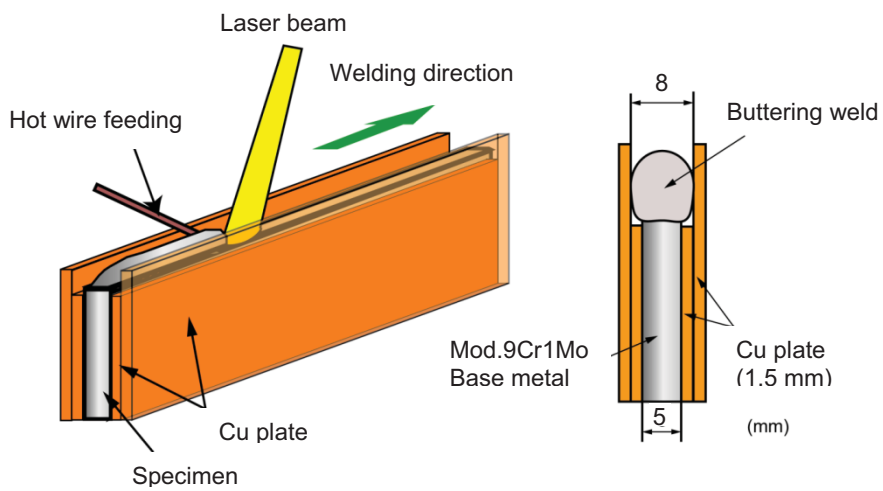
Schematic illustration of buttering welding using hot-wire laser welding.
